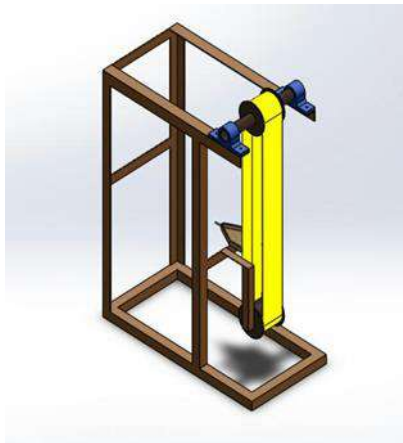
3D CAD model of Belt Type Oil Skimmer
